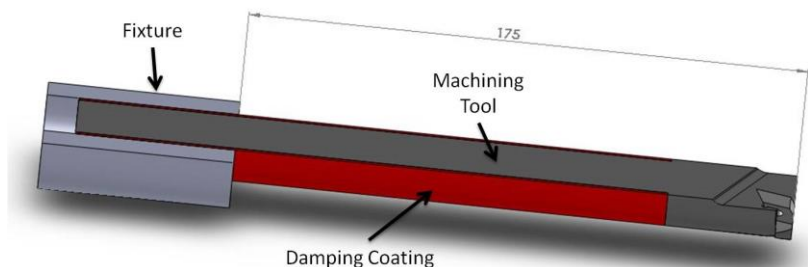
Assembly of a machining tool coated with a damping coating (red) and clamped in a fixture.
